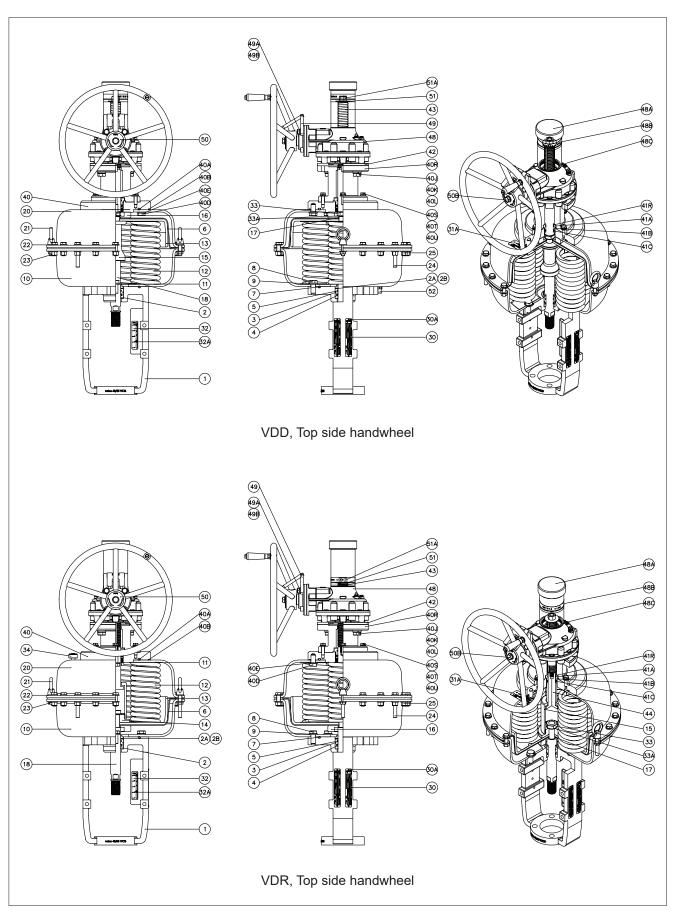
VD_48/55, Standard parts & materials with handwheel
